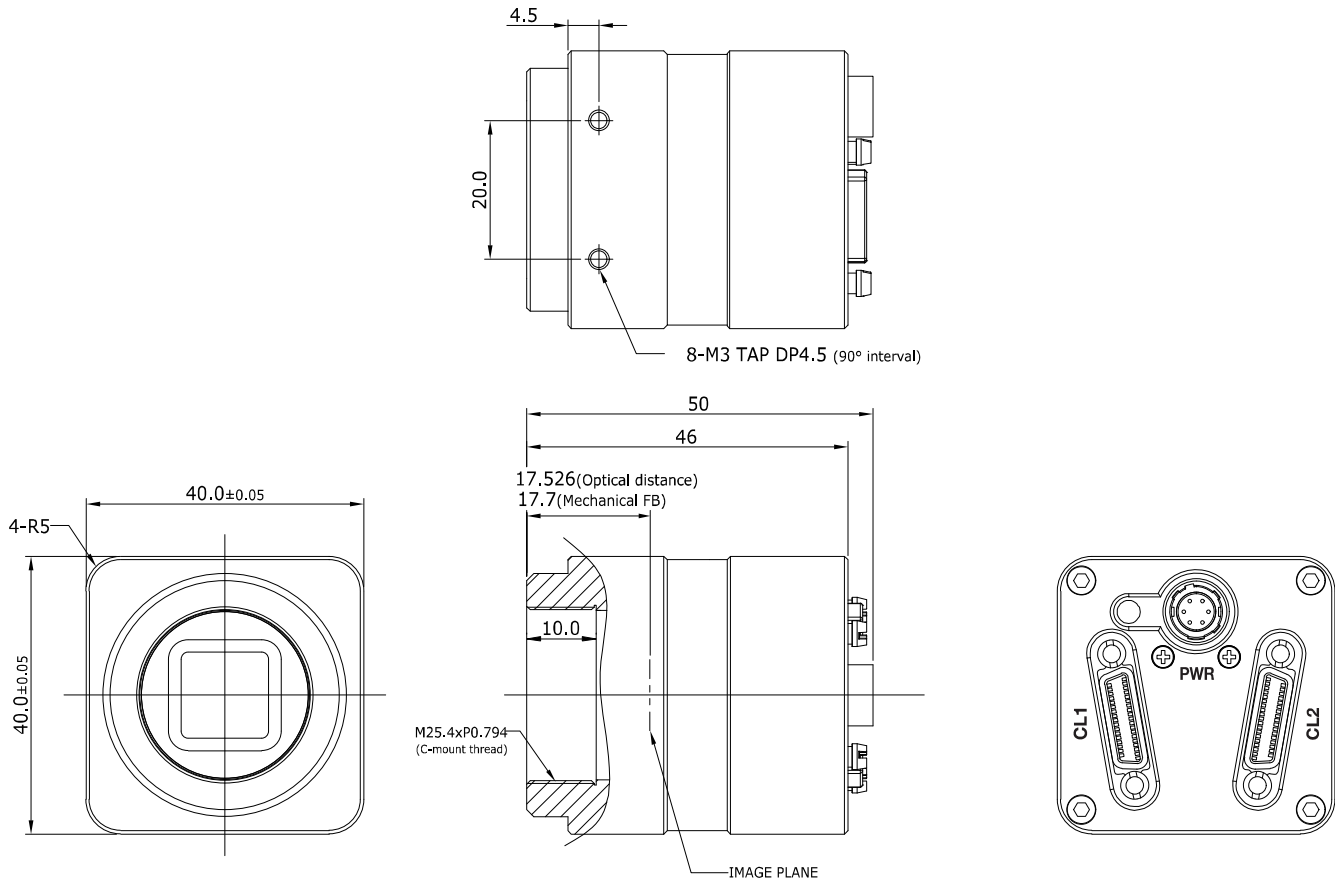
VC-5MC-M/C110H Mechanical Dimension
